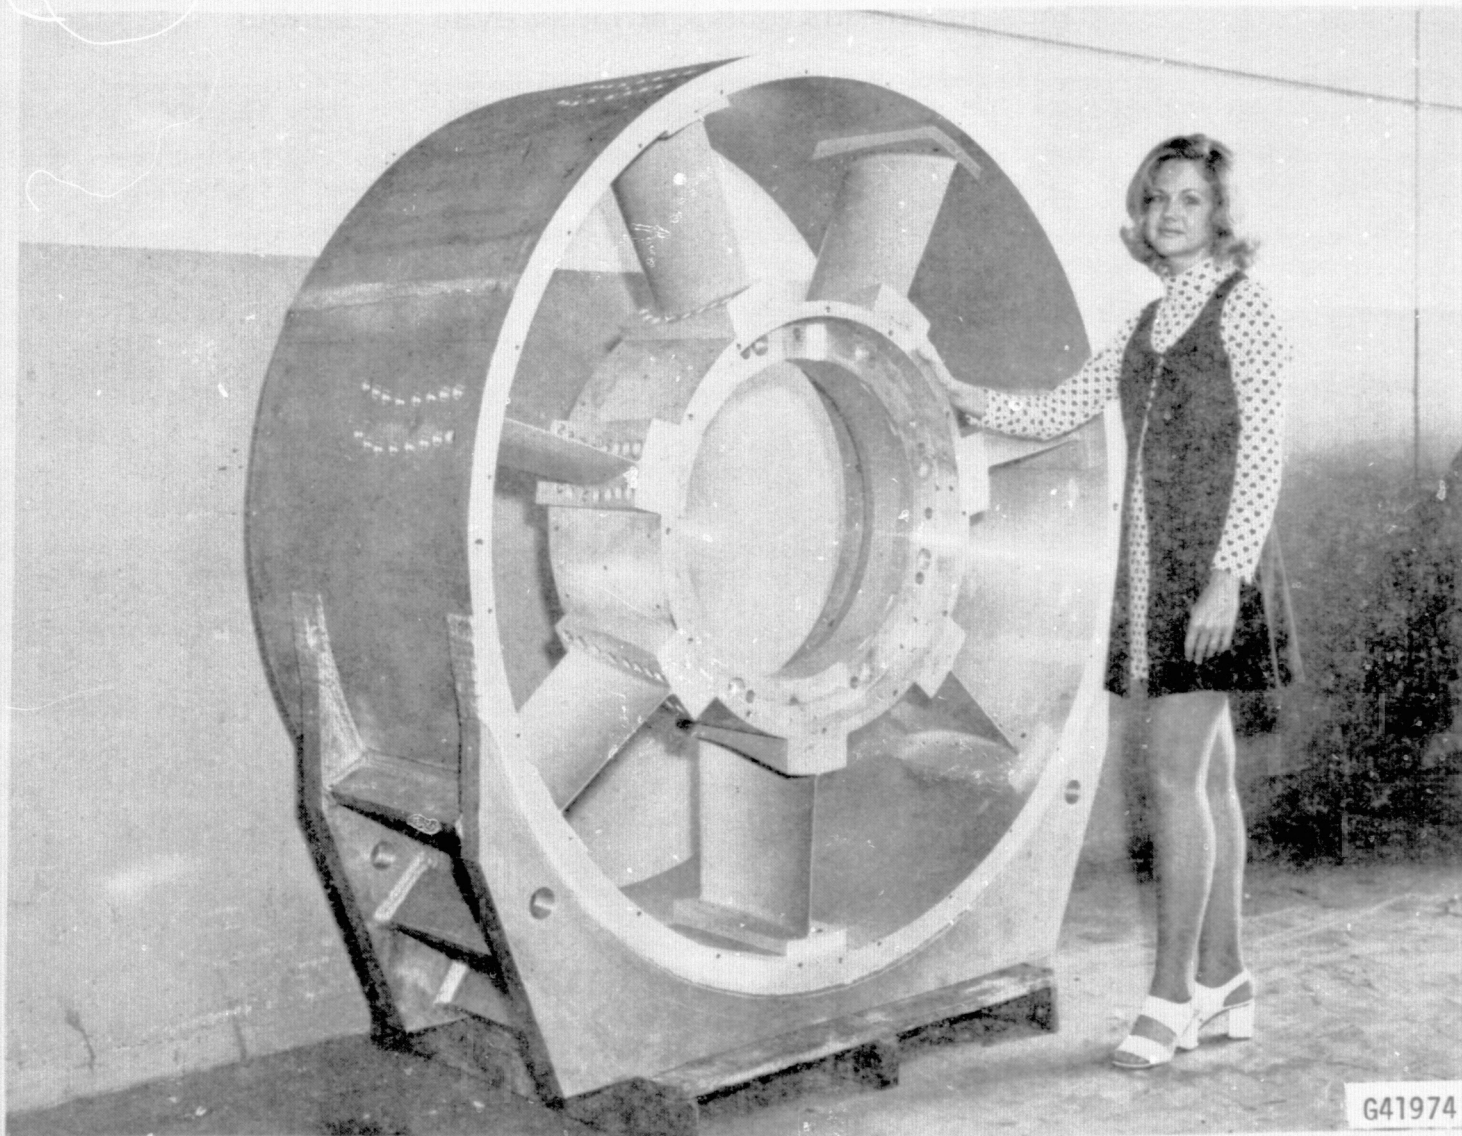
SUPPORT STRUCTURE AND EXIT VANES SUBASSEMBLY WITH GEARBOX HOUSING INSTALLED
